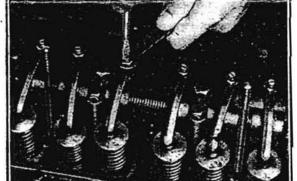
Showing the special spanner used for valve clearance adjustment
